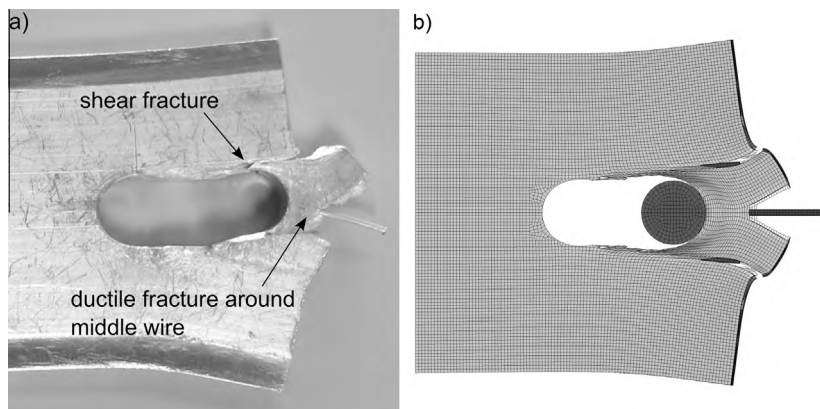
(a) Experimental and (b) simulated fracture for a bolt-pull-out test in wire direction of SWRA.
